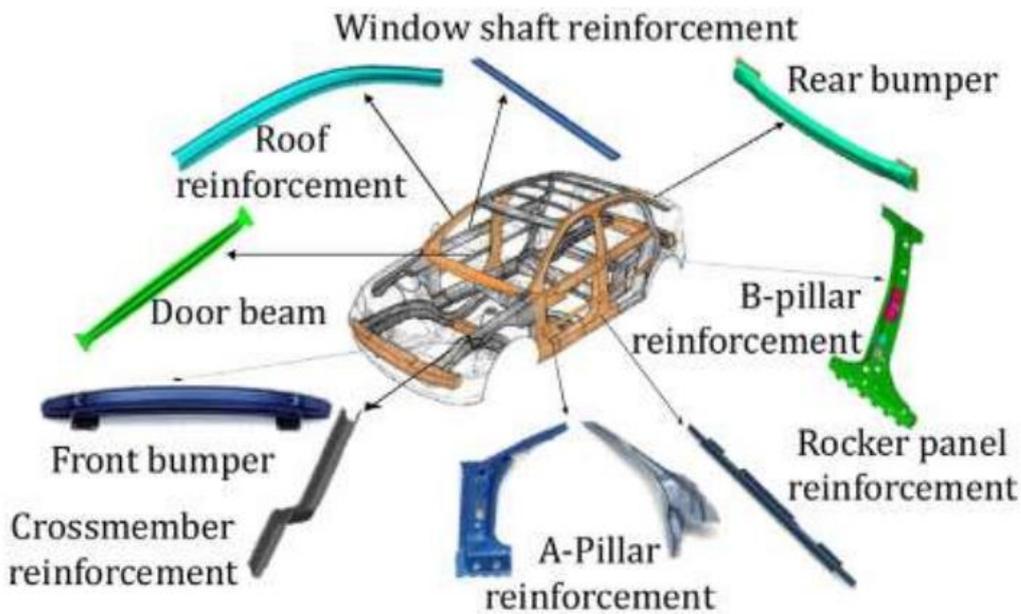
Hot stamped parts produced by *Benteler Automotive* (courtesy of *Benteler Automotive*). [6]
